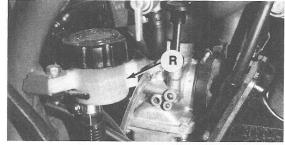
View identifies rear brake master cylinder reservoir (R).
